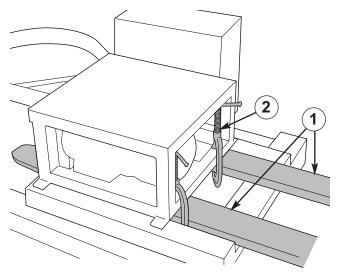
Always use frame to lift or move machine. (1) Lifting Forks, (2) Clamp
